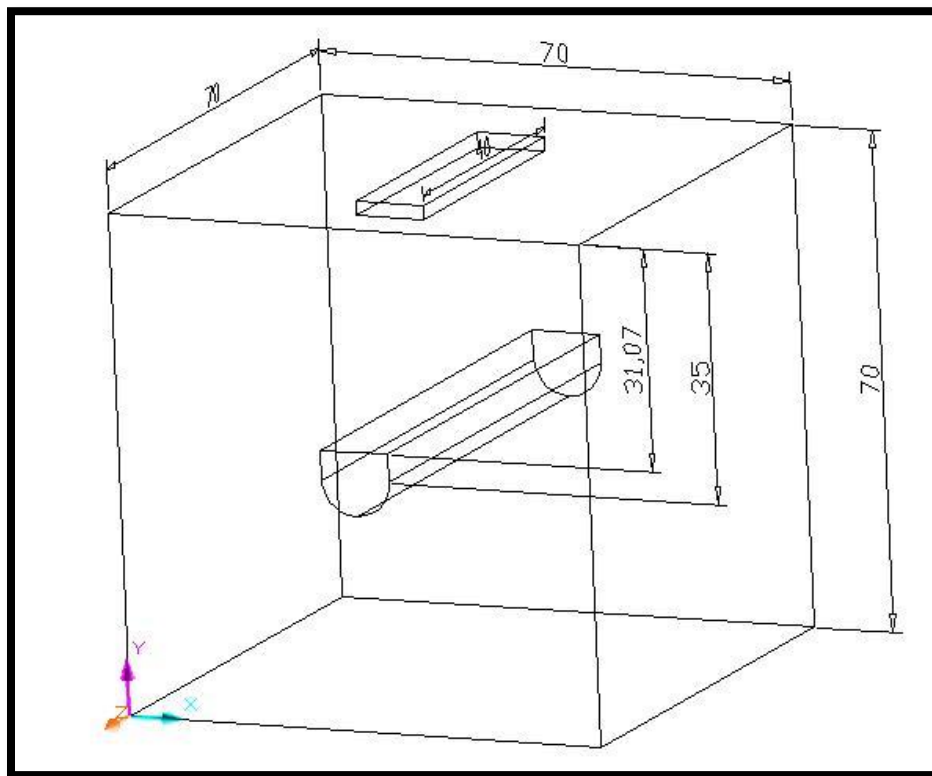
3D view for Dimension of 'D' shape cross-sectional cooling channels
